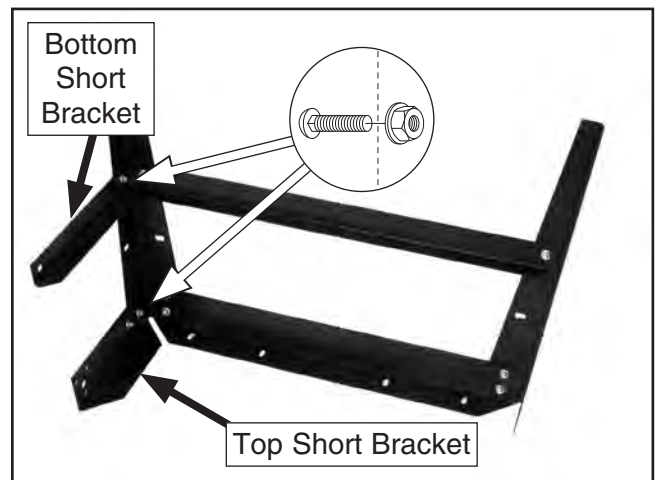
Top and bottom short brackets secured to stand leg assembly.
